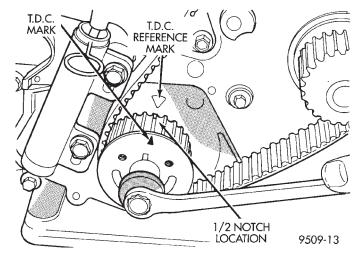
Adjusting Crankshaft Sprocket for Timing Belt Installation
